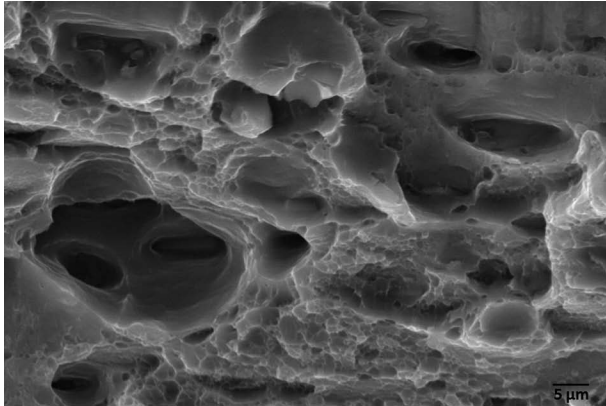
Higher magnified image of the fracture surface shown in Fig. 93
